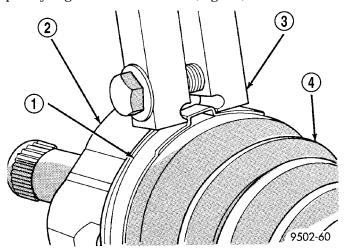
Crimping Tool Installed on Sealing Boot Clamp
